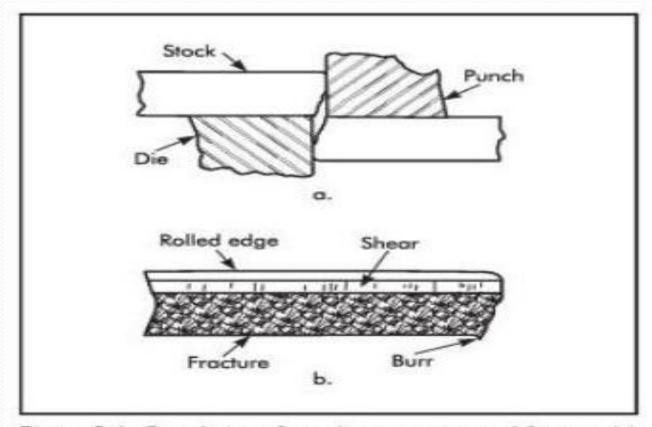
Completion of punch penetration and fracture (a) with a generous punch-to-die clearance. View of a cut edge (b) with large punch-to-die clearances.
